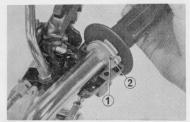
(1) Throttle coble end (2) Grip pipe
